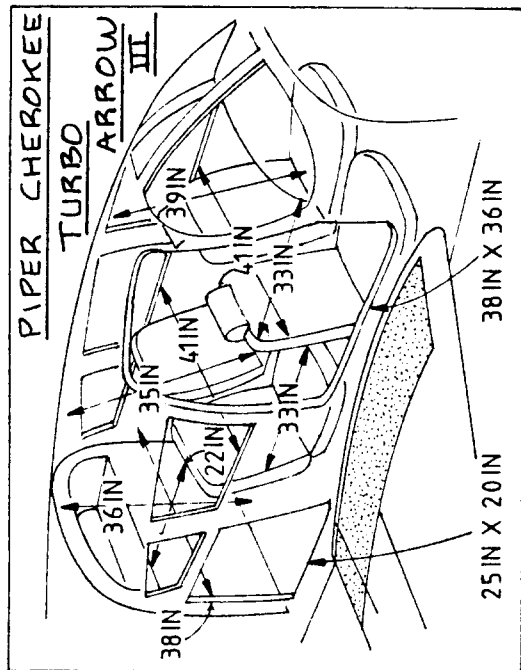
Cabin and Baggage Hold Dimensions for Single Engine Piston/Propeller Driven Airplanes
